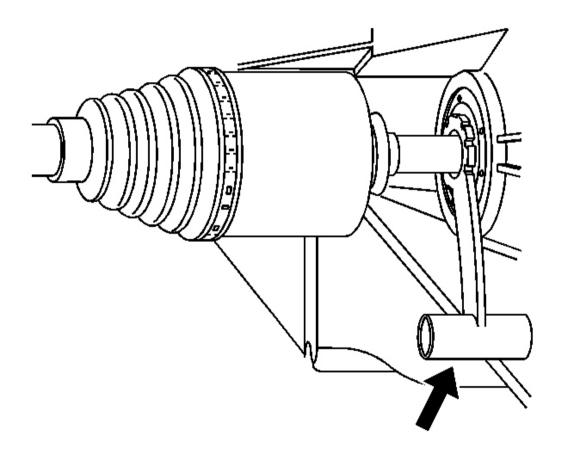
Drive Axles & Transaxle Courtesy of GENERAL MOTORS CORP.
